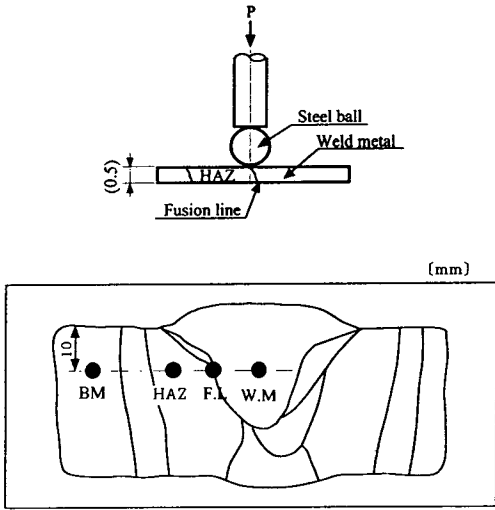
Schematic illustration showing the extracted position of SP test specimen in welded block of TMCP steel.
